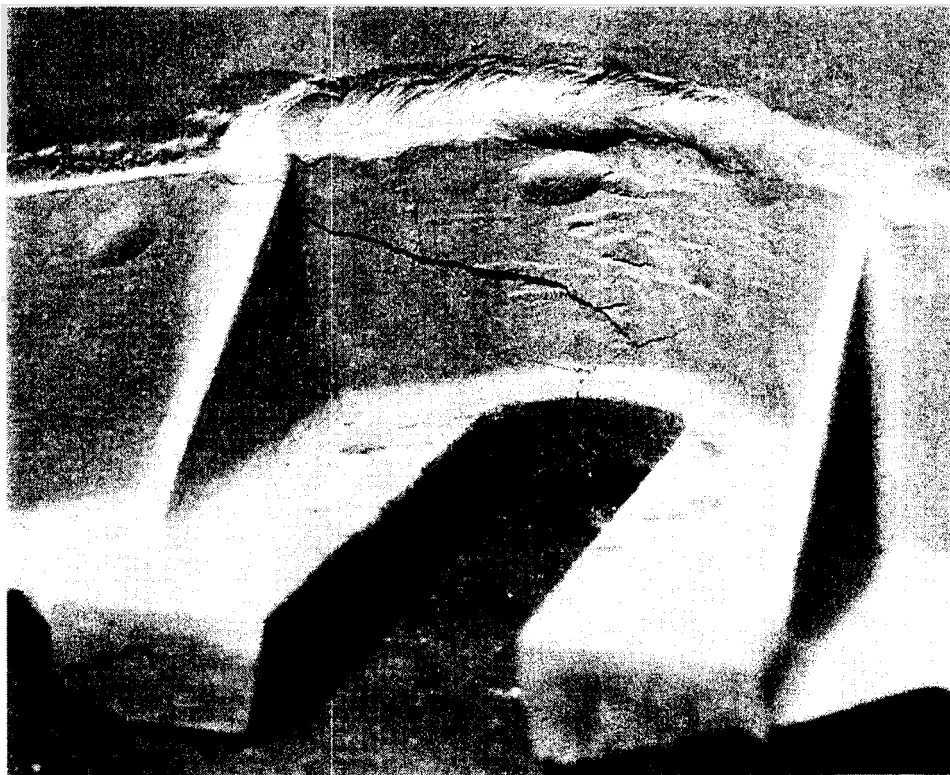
Fatigue Crack in Finger Tabs of Transformer Base of Specimen S-6
